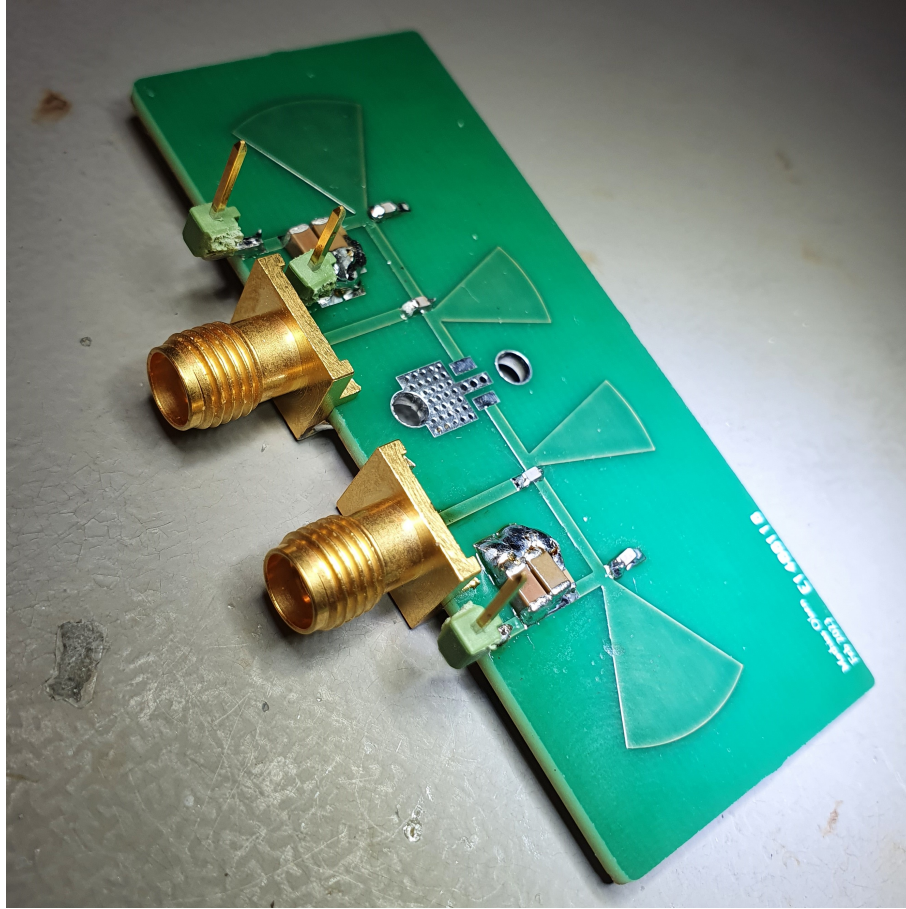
The physical PCB with the earth plane, to later be covered by the transistor, exposed. The transistor is later attached to the PCB with a 3D-printed plastic clamp and two screws.
